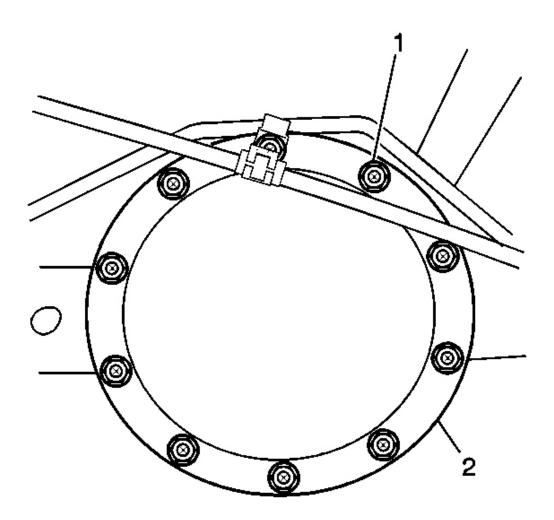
Identifyng Rear Axle Housing Cover & Bolts Courtesy of GENERAL MOTORS CORP.
